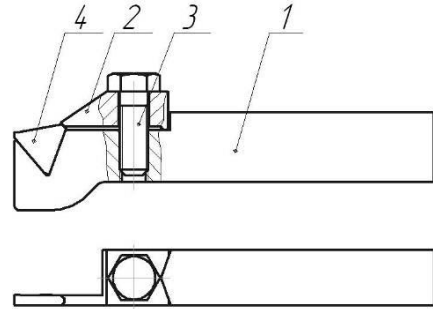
Design of assembled cutoff tool with lateral installation of multifaceted plates
